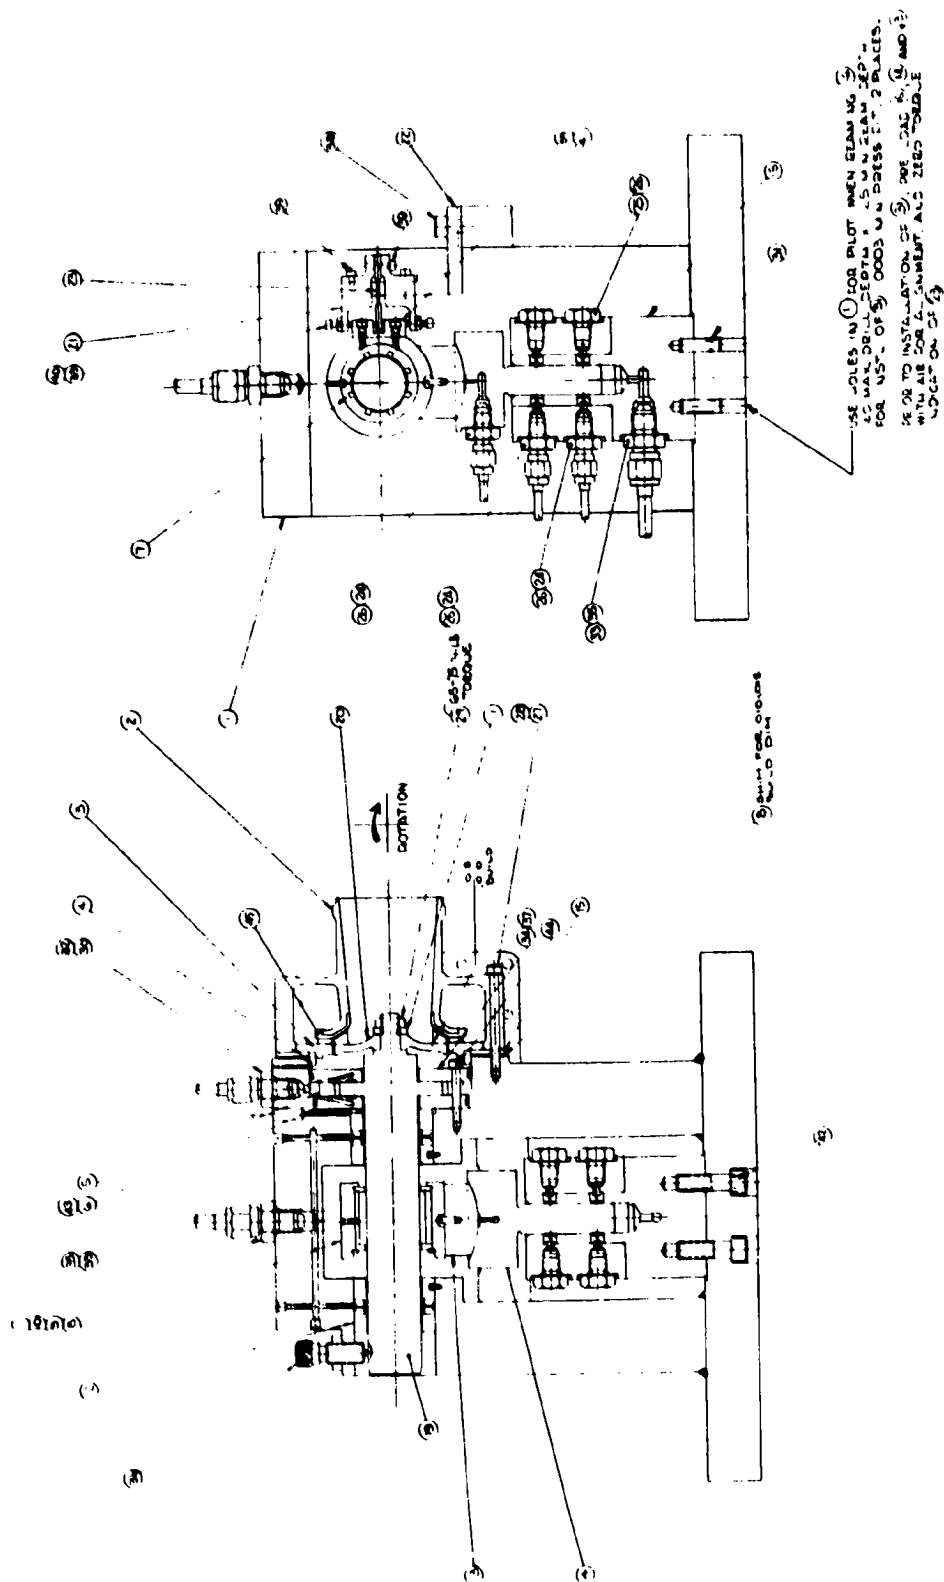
Test Rig Assembly, Mini-BRU Thrust Bearings.
